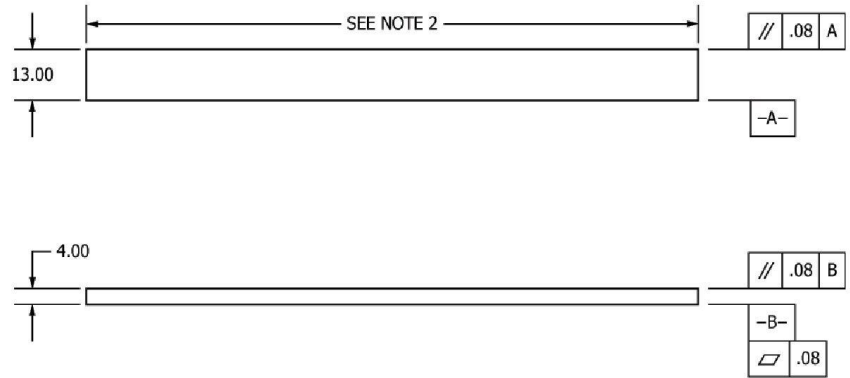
Standard Flexural Test Specimen Drawing (SI)
